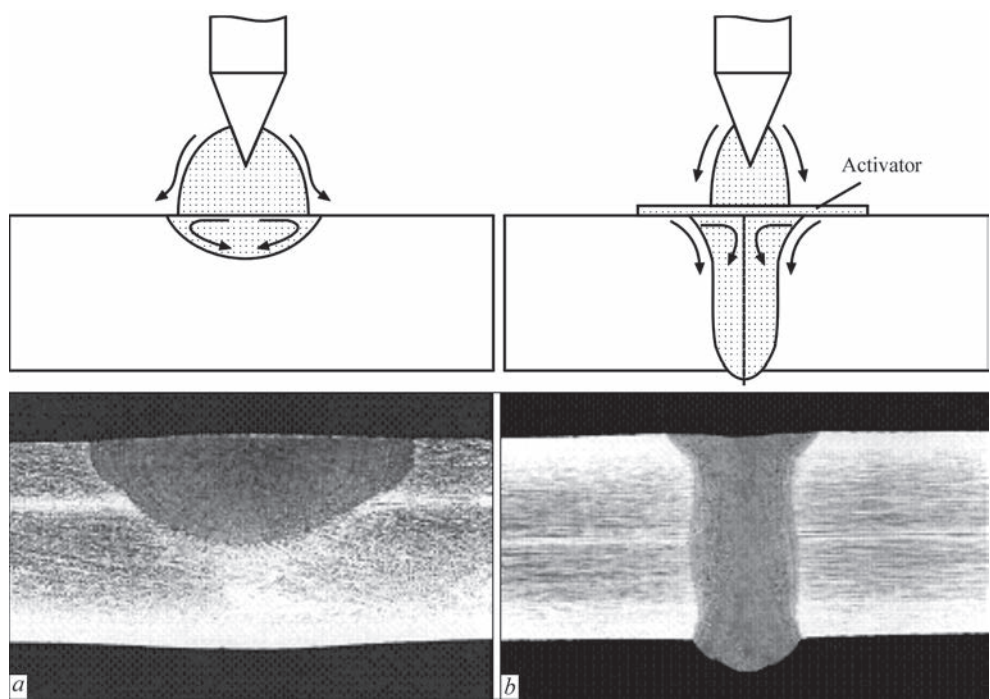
Schematic image and appearance of welds of stainless steel 04Kh18N10T of $\delta = 6$ mm thick, produced by TIG (a) and A-TIG (b) welding on processes one welding mode: welding current is 200 A; speed of welding is 120 mm/min, arc length is 1.5 mm [1]
